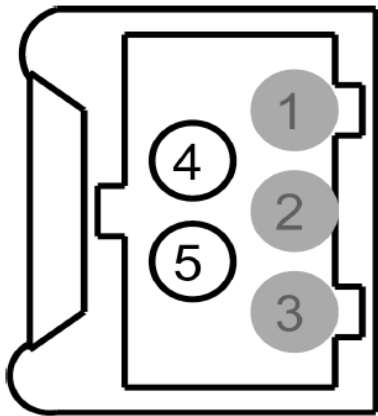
Clutch Pedal Position Switch Connector End View (C2353)
